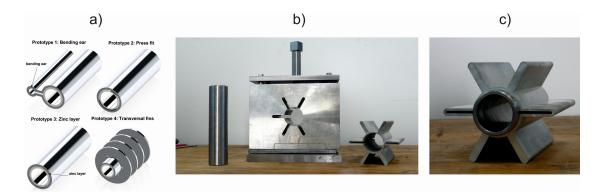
Prototypes for bimetallic finned tubes (a) and assembly apparatus with assembled tube (b) and (c)
